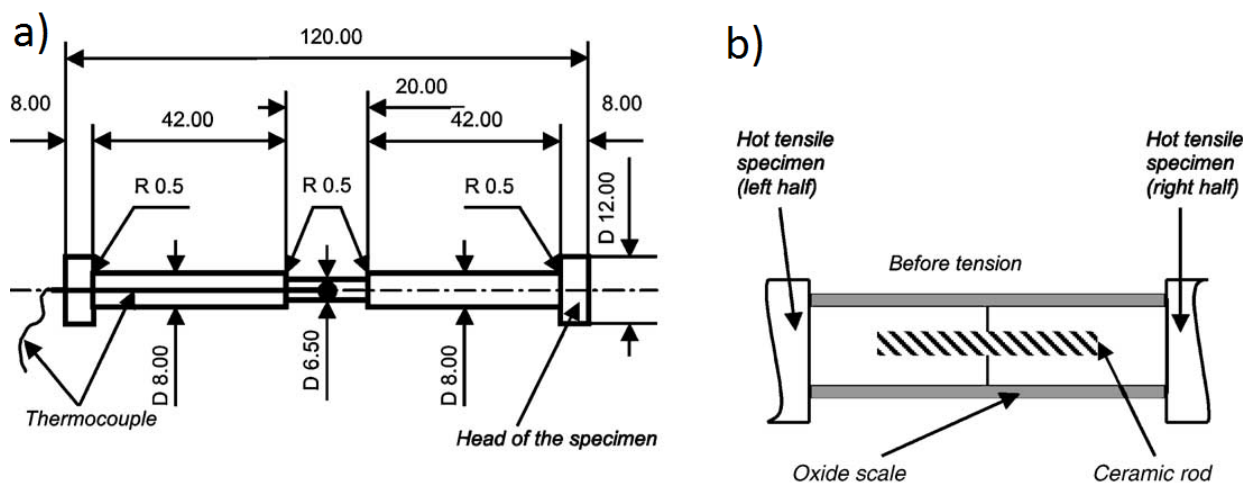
(a) Drawing of the tensile specimen (dimensions in mm); (b) schematic representation of the tensile specimen Krzyzanowski et al. for evaluation of the oxide scale adhesion and fracture loads [34].
